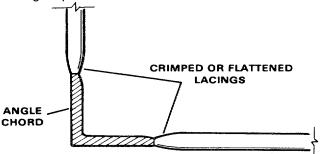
Fit-Up of Lacings to Chords 1. Cut the lacing to be replaced off about 1/4 inch (6 mm) above the weld, using a hacksaw, carbon arc torch, or disc grinder. See Figure 14-7 and 14-14.
